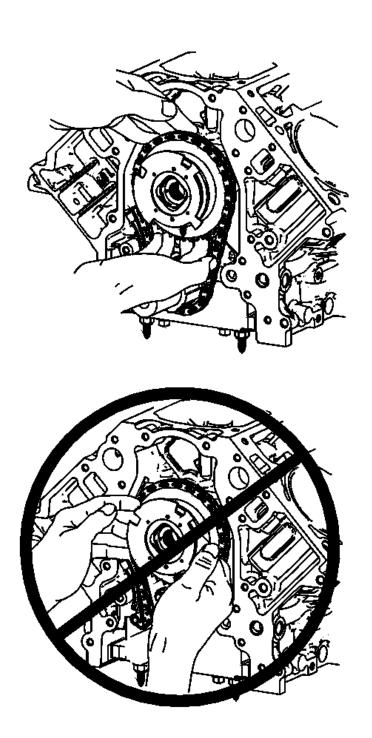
View Of Proper CMP Actuator Removal Courtesy of GENERAL MOTORS CORP.
